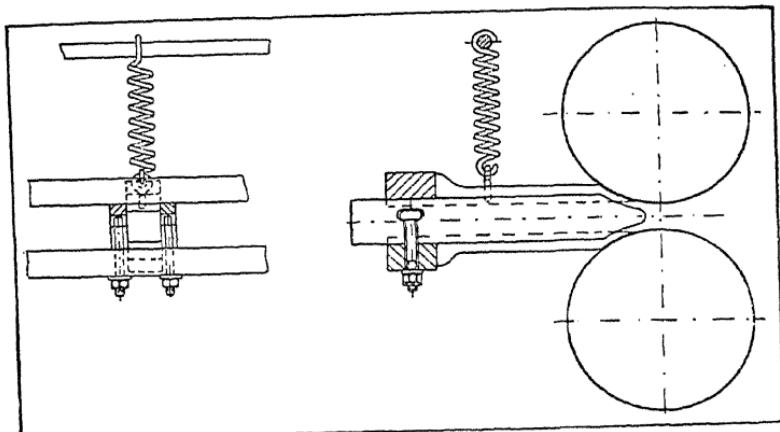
Rolling Beam to Which the Cast-Iron or Forged-Steel Guides Are Fastened by Wedges
